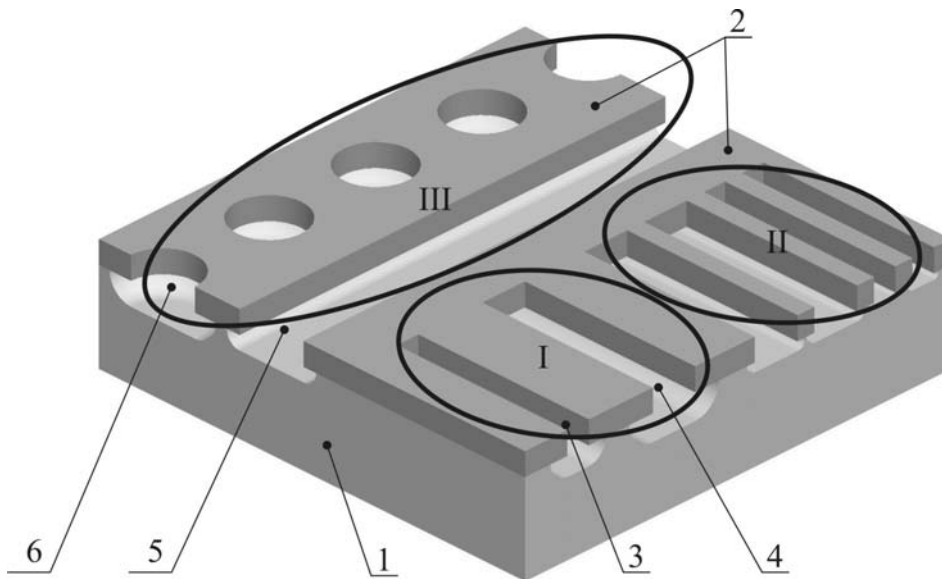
A scheme of electrochemical machining using the mask with the blanks of different shapes and sizes: (1) a workpiece (substrate); (2) a mask
